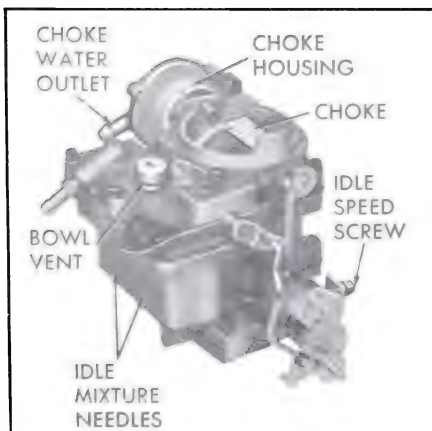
Rochester 2GC Carburetor Assembly-300 Engine
